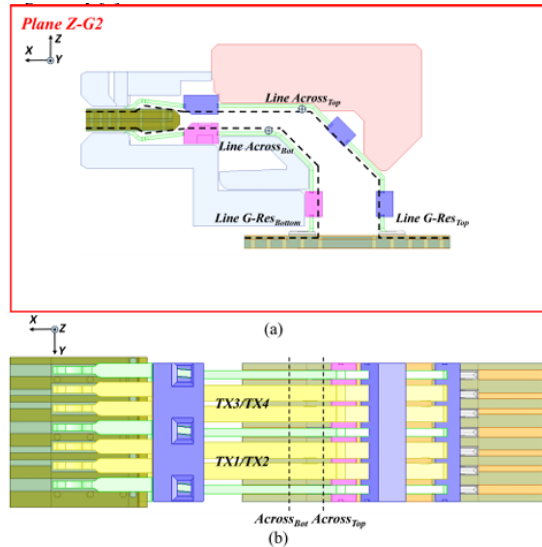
OSFP connector mated with the Host and Module PCB in a C2M interface: (a) side view and (b) top view.
